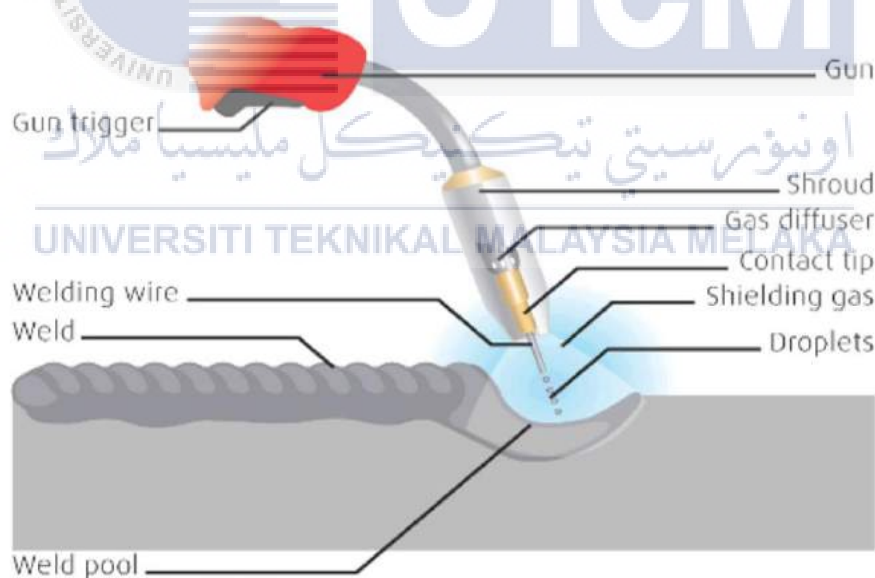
Gas Metal Arc Welding (GMAW) (<https://www.sparkweld.com/en>, 2018)
